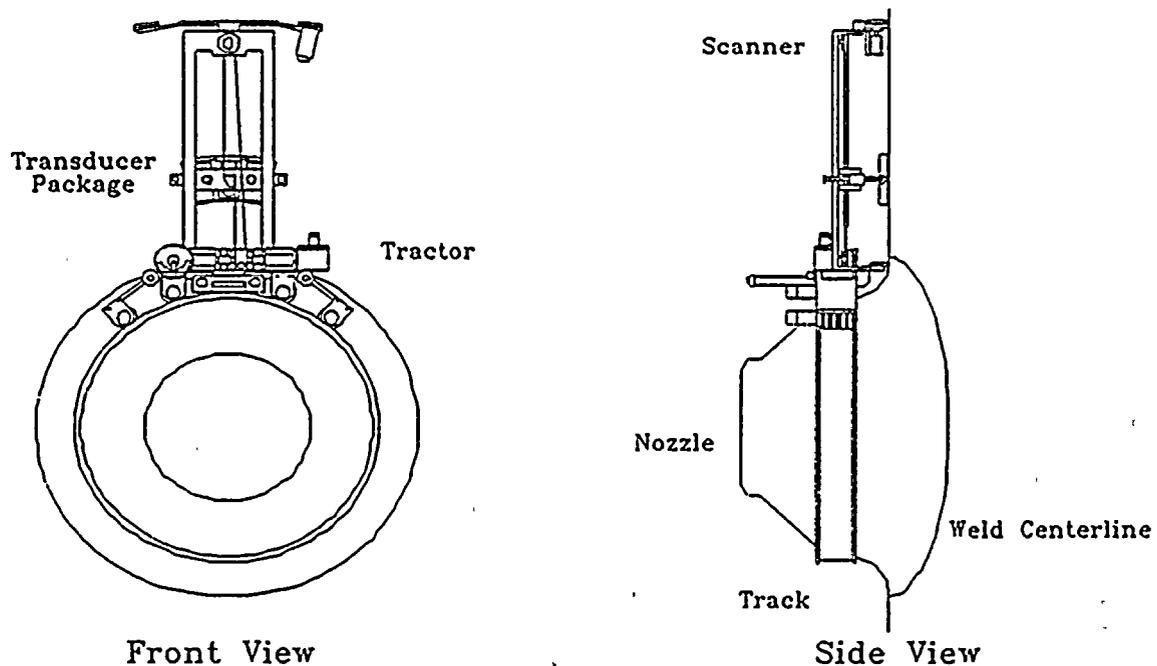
Nozzle-to-Vessel Weld Scanner
